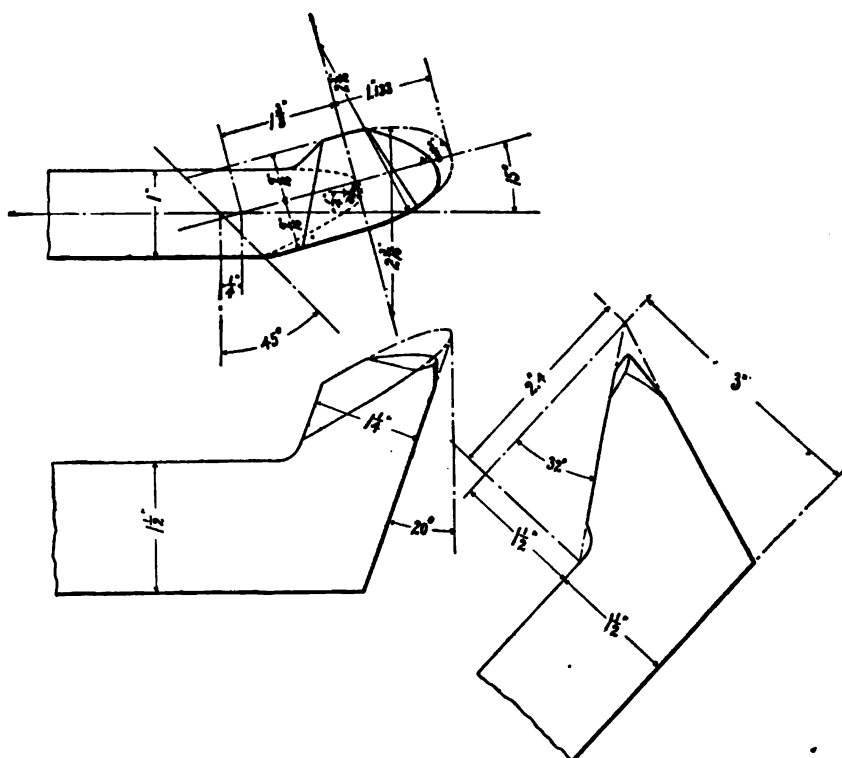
Detailed dimensions of Taylor standard one-inch round-nosed roughing tool. Forged outline shown by dotted lines.
